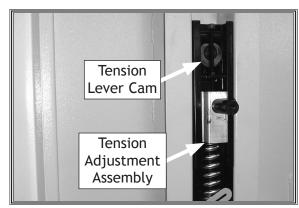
Tension adjustment assembly lubrication locations (top wheel removed for clarity).
